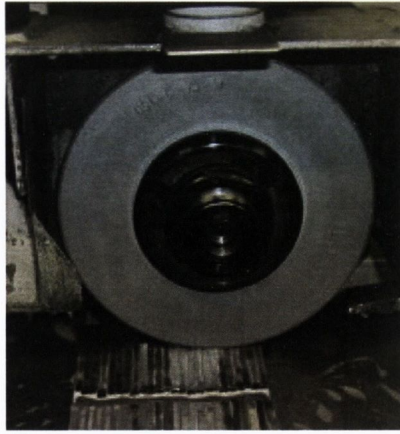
Surface grinding (electroplated diamond wheel) operation used to ensure correct dimensions regarding the height (W) for the fracture toughness specimens.
